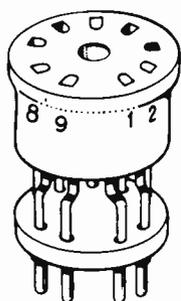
Valve adaptor which can be used in these circumstances is the valve plug-holder.
